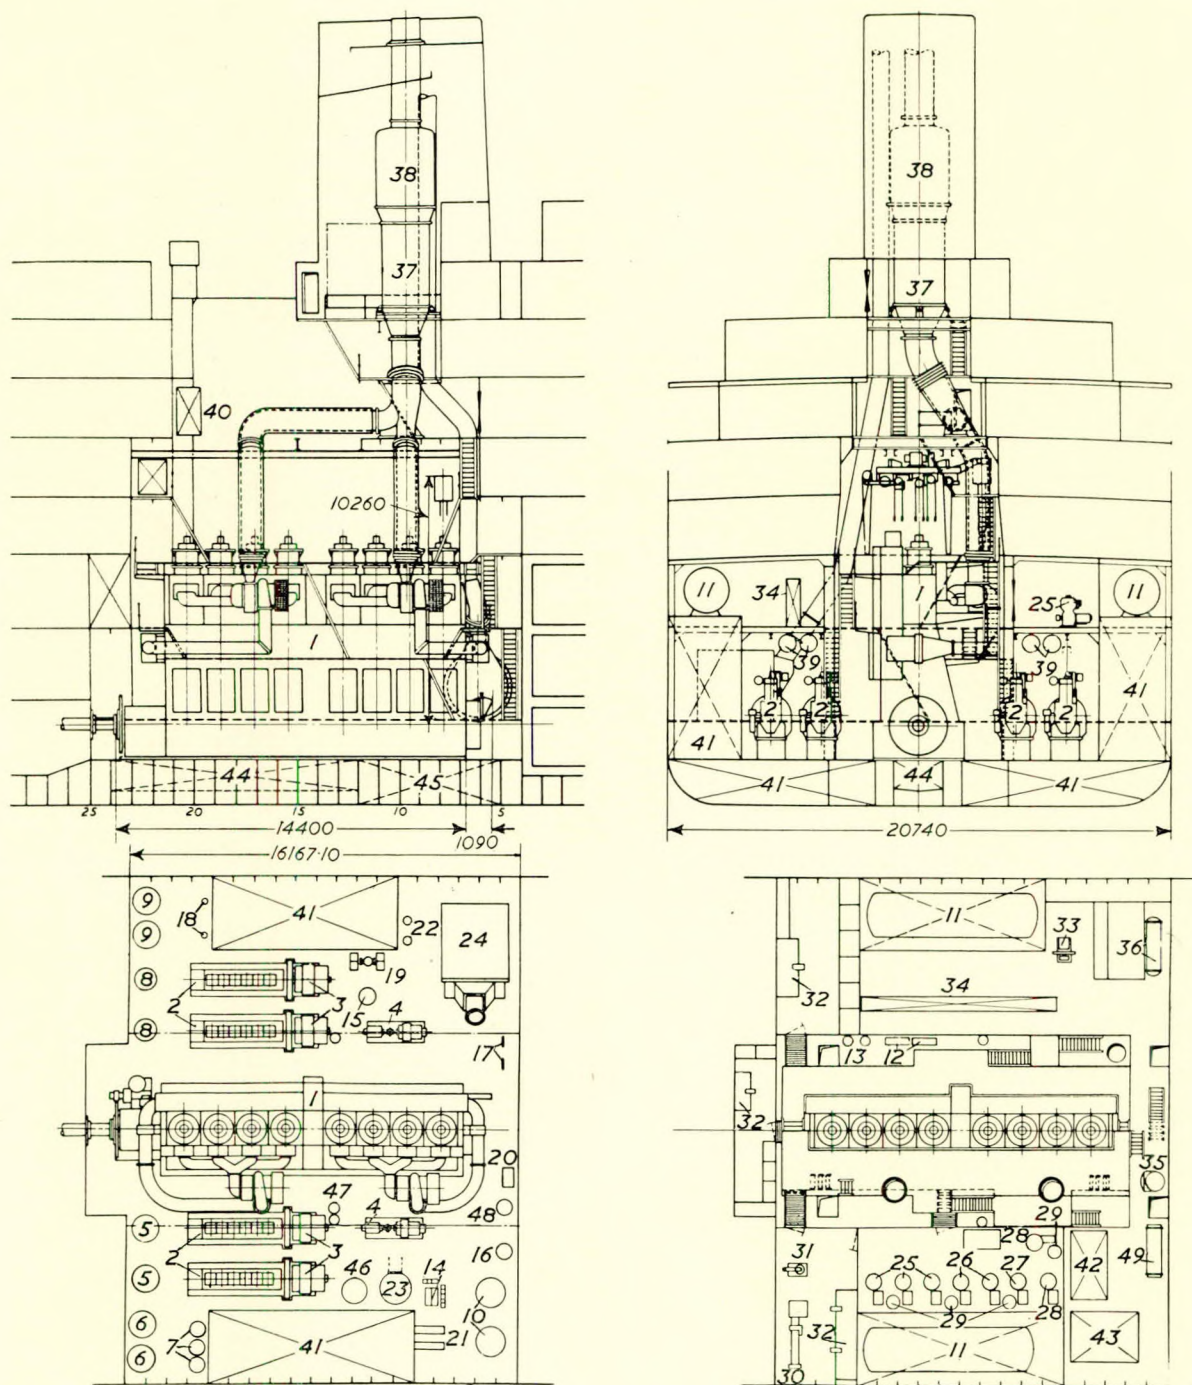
Single-screw two-stroke machinery: 10,500 s.h.p., 115 r.p.m.
